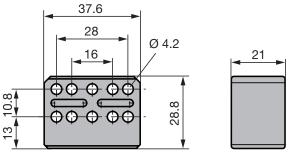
Installation dimensions for BTL6-A-3800-2
